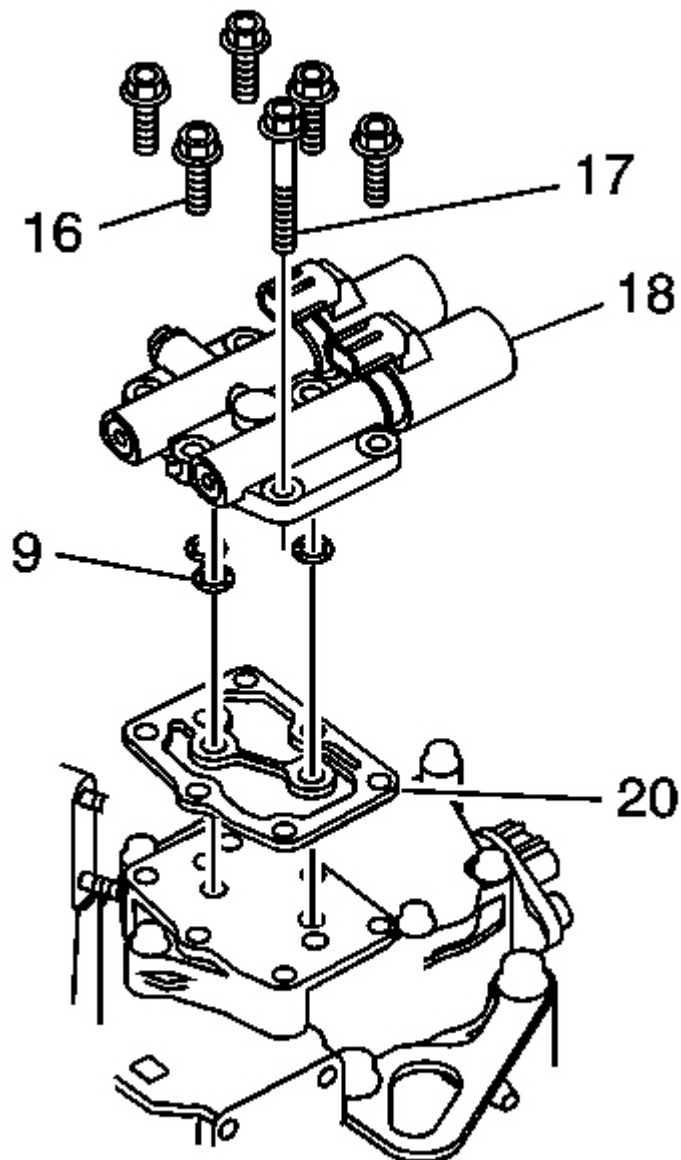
Clutch Pressure Control Solenoid, Bolts, Valve, Gasket & Fluid Feed Pipe O-Rings
